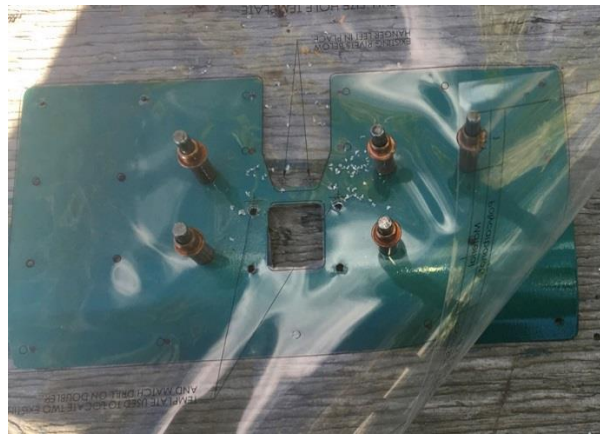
Match drilling existing rivet holes in inboard doubler from template
